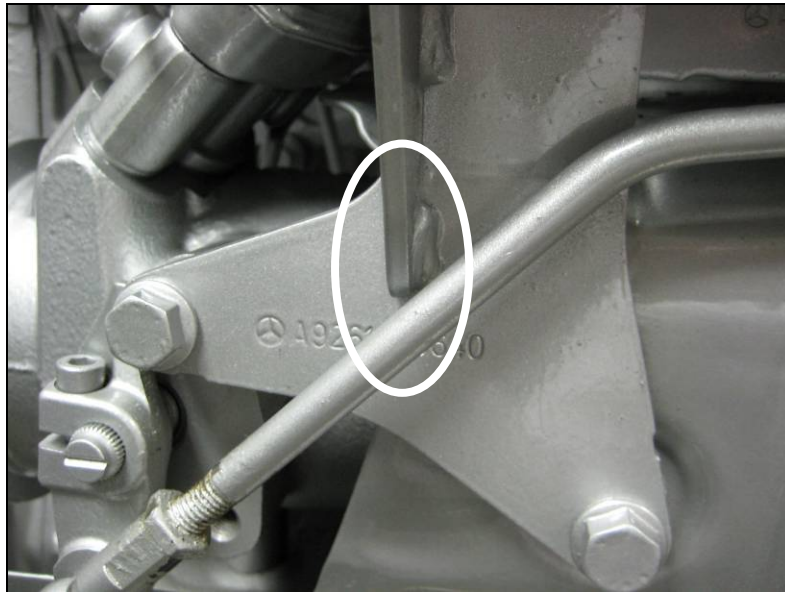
Clearance Check Between Linkage Rod and Bracket
